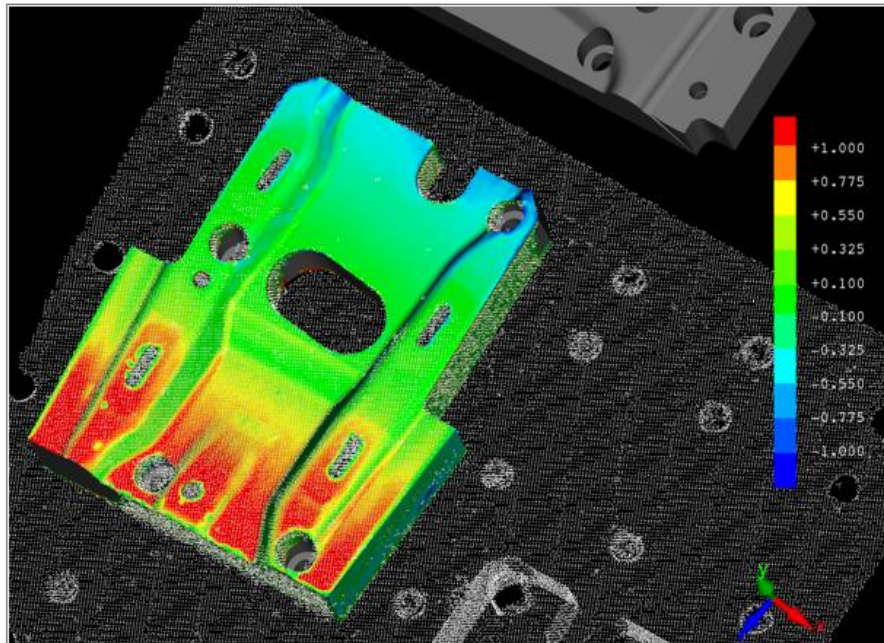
Example of the disparity map of a manufactured part, tolerances are defined at +/- 1mm
